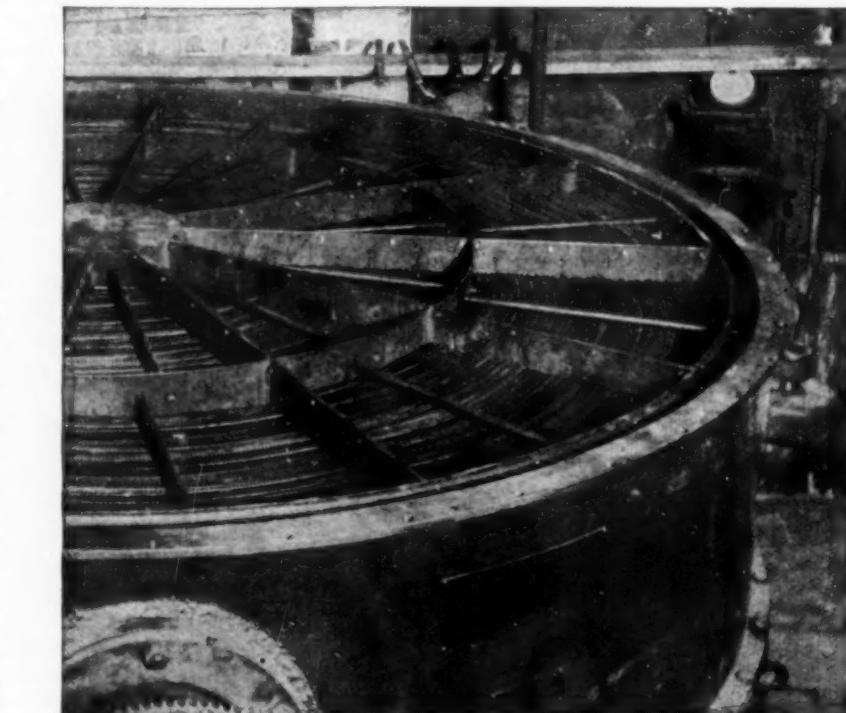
VIEW OF THE ROTOR SHOWING ITS DESIGN
